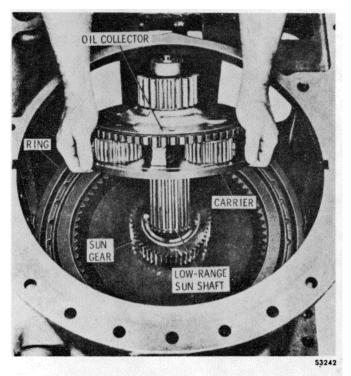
Removing Intermediate-Range Carrier Assembly and Components
